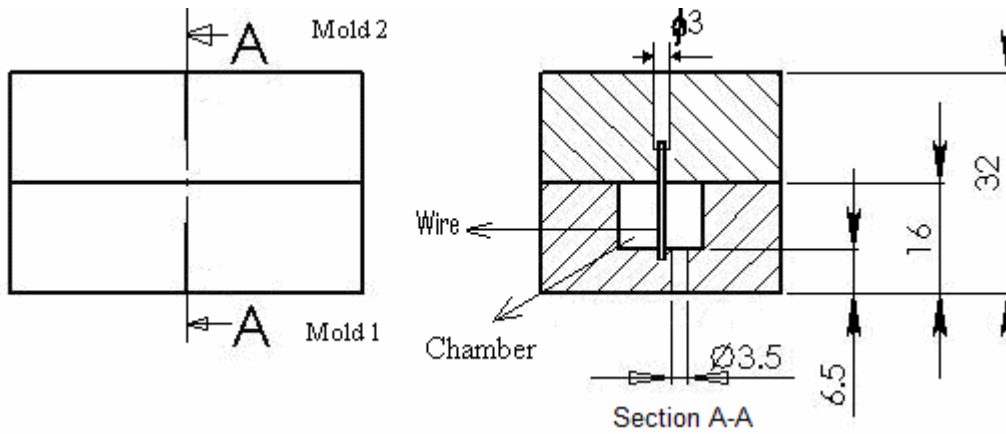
Drawing for mold 2 (Material: aluminum, dimensions: mm)
